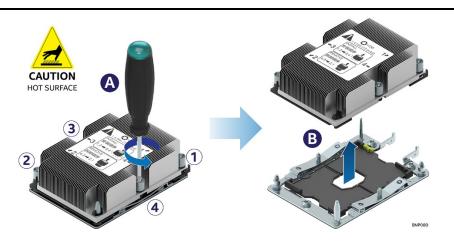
Uninstalling the Processor Heat Sink Module (PHM)
